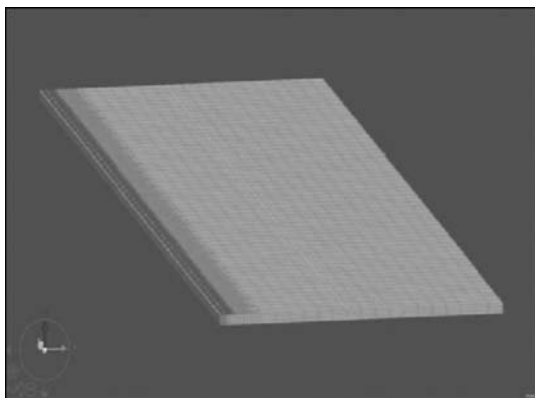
Results of simulation of laser welding of the 5754-H22 Al-Si alloy by software package LaserCAD
